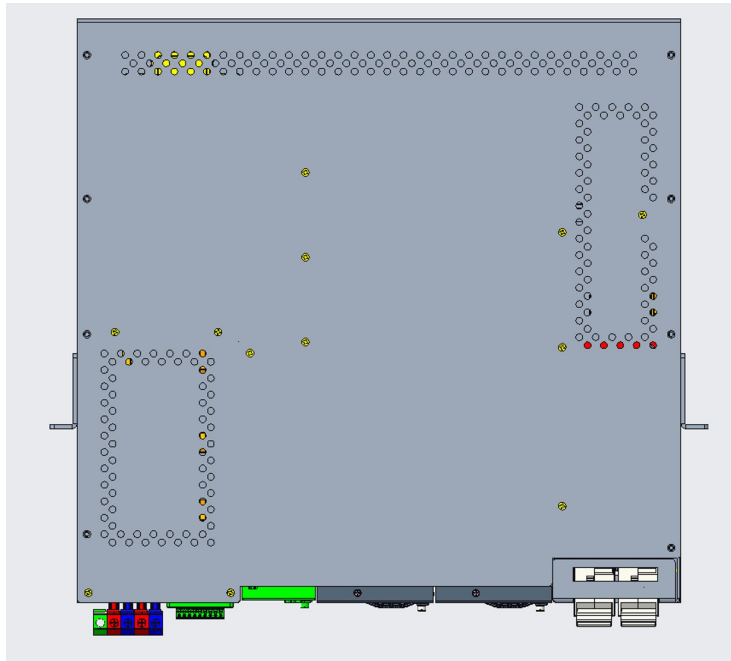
Isometric View Rack Mount: Solar Add-On Shelf with 19-inch Mounting Brackets with 5-inch Recess
